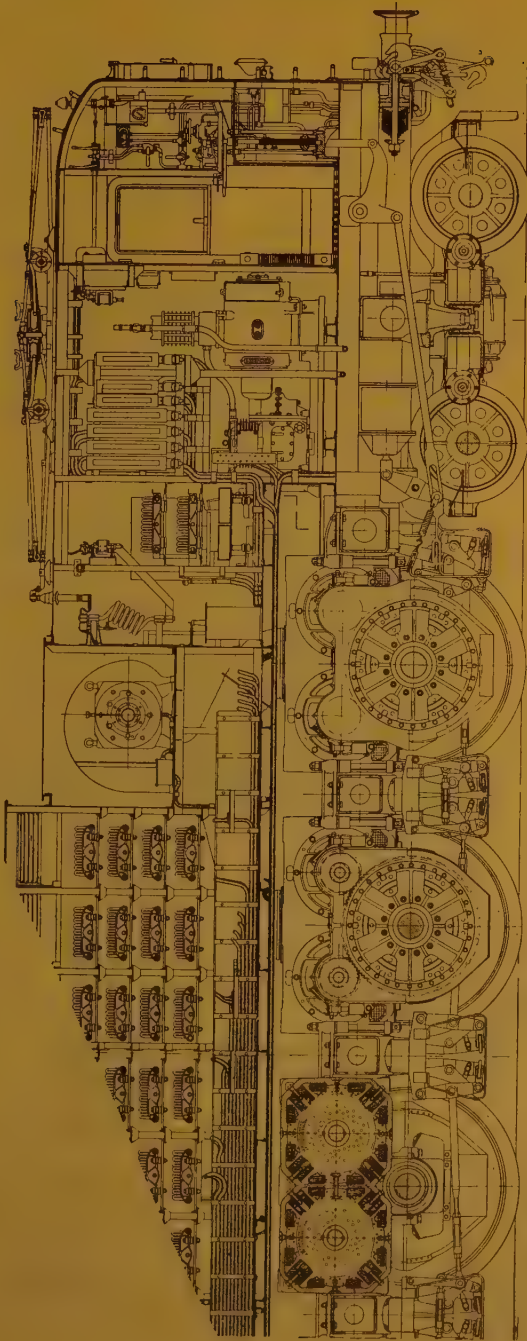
Part longitudinal section of locomotives in figs. 107 to 109, showing details of the motors, gears and drive.
